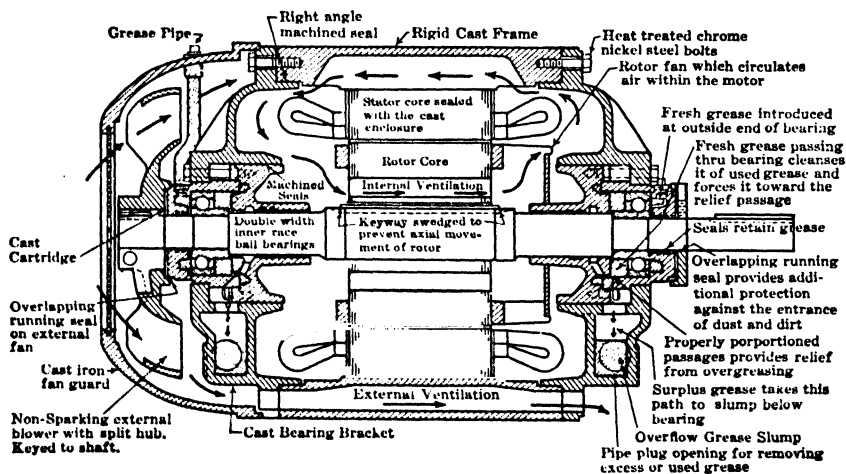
Air flow in a totally enclosed fan-cooled, squirrel-cage motor.
